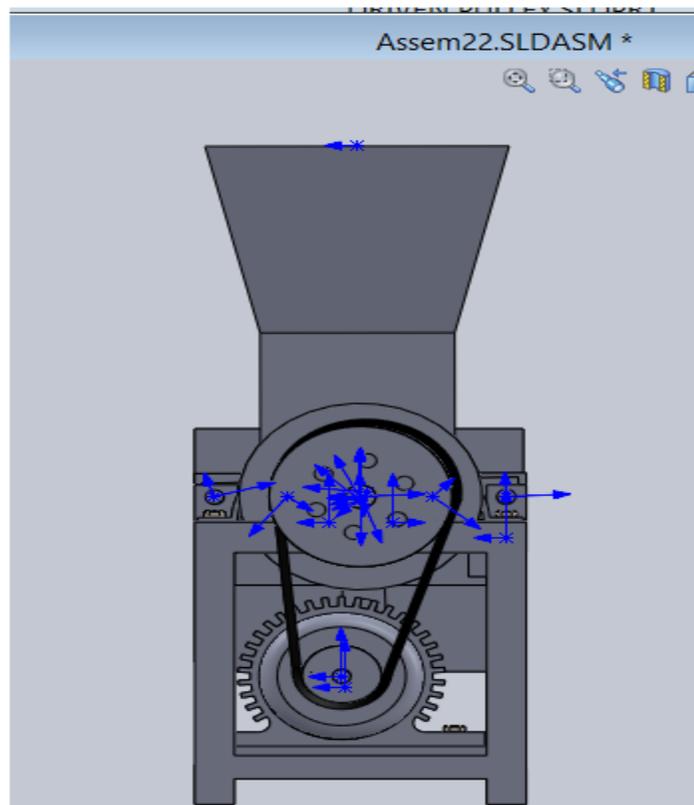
Front View of the Continuous Palm Oil Fruits Digesting Machine
